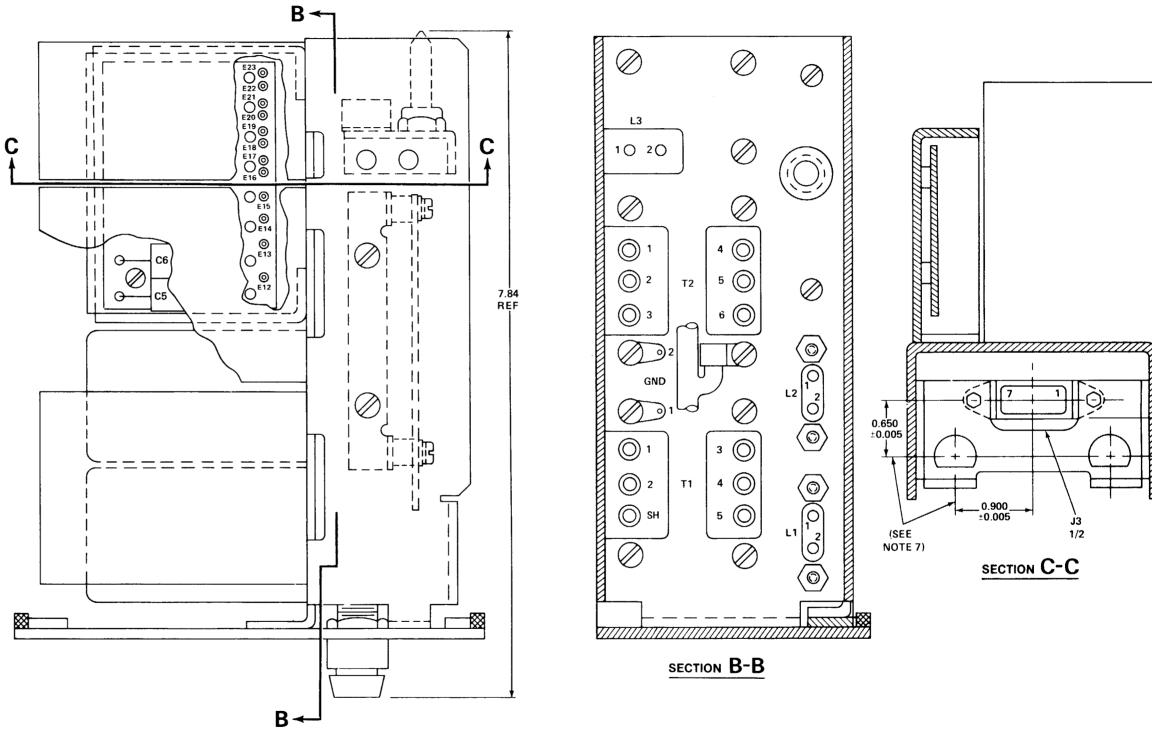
Power supply assembly 18A1(), parts location diagram.
